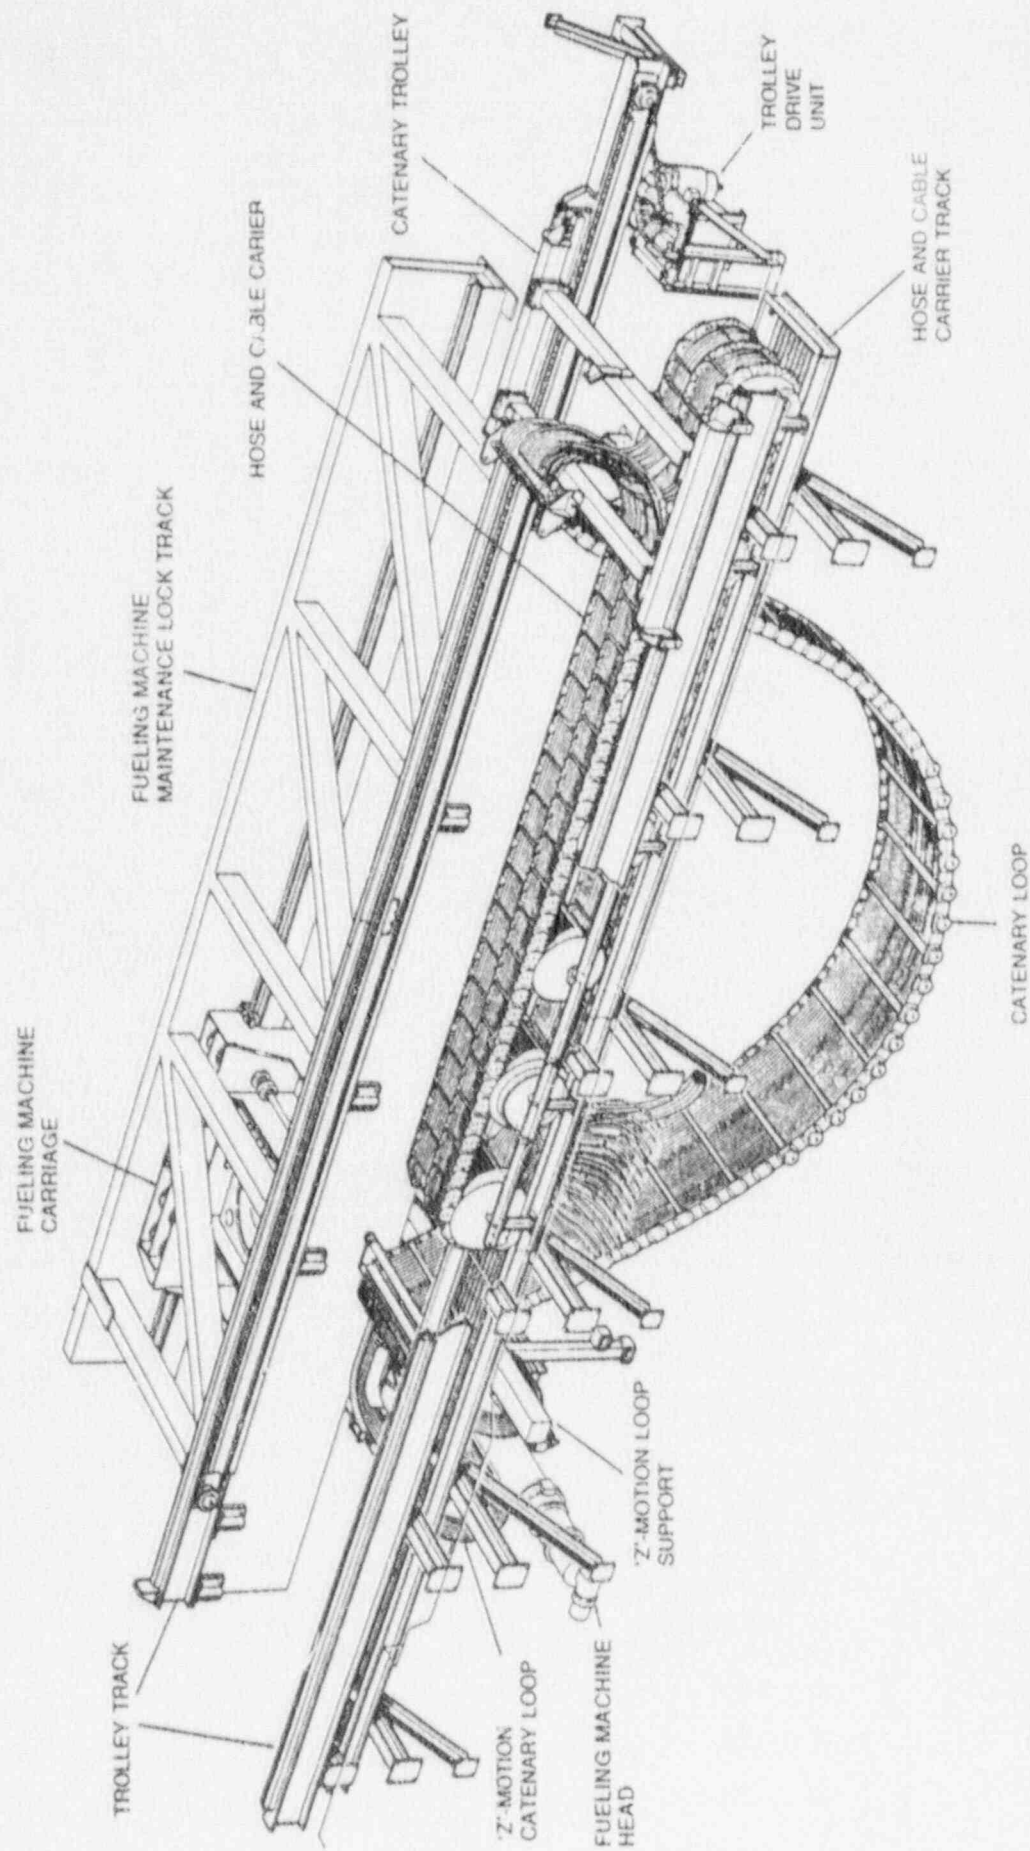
CATENARY SYSTEM ASSEMBLY
